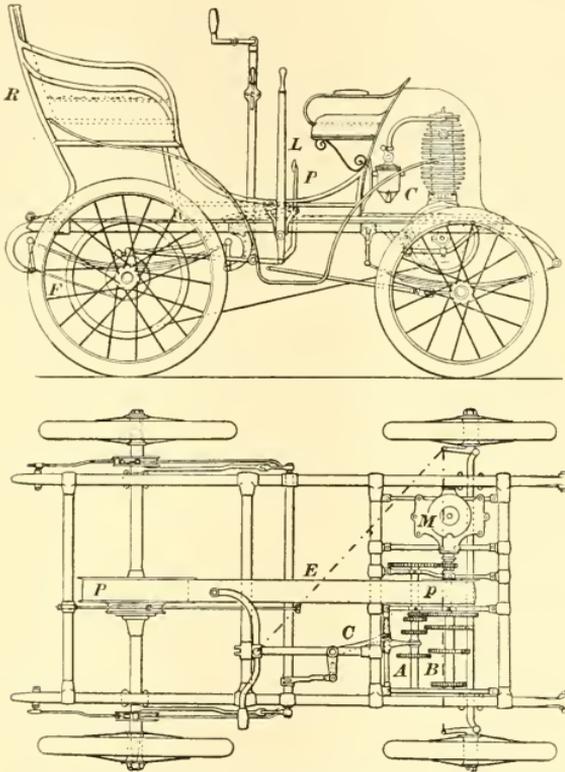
PLAN AND ELEVATION OF UNDERBERG MOTOR VOITURETTE.
